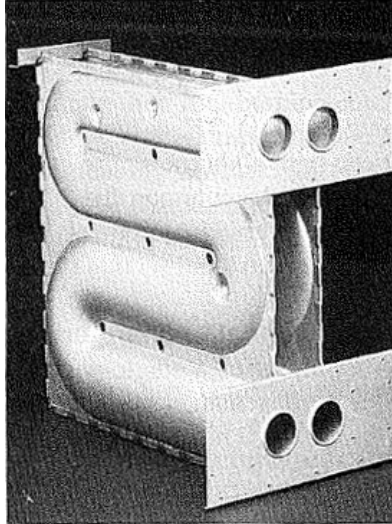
Examples of serpentine (clamshell) heat exchanger.¹⁷
